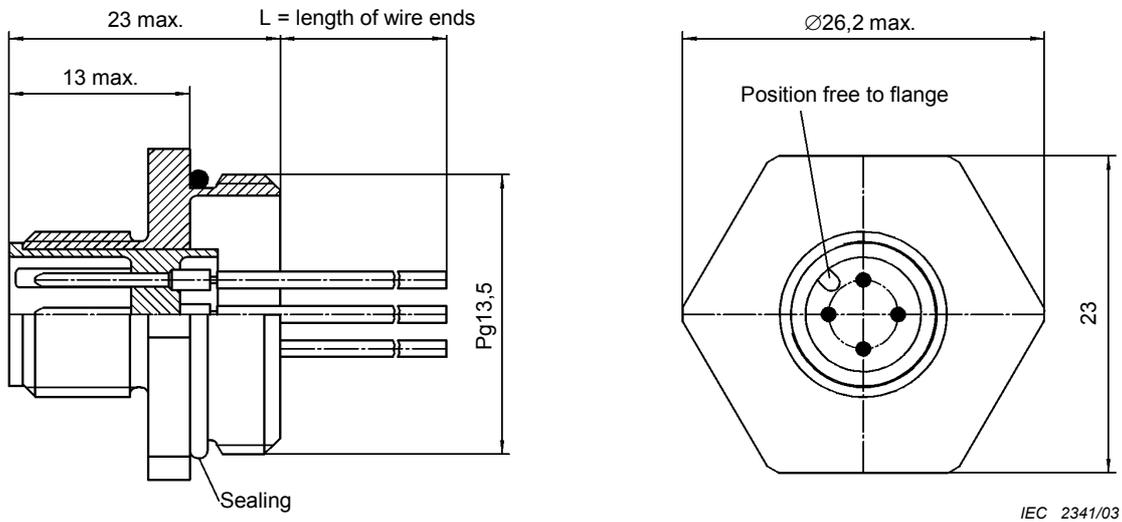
Fixed connector, with wire ends, single hole mounting Pg13,5, male contacts
